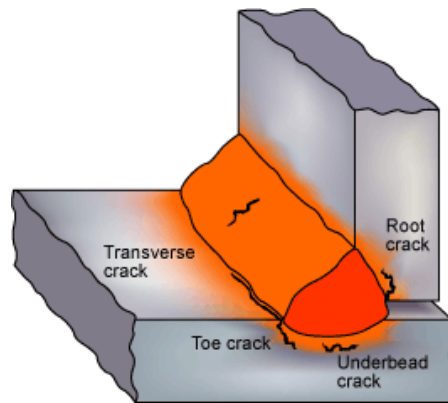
Hydrogen cracks originating in the HAZ and weld metal.
